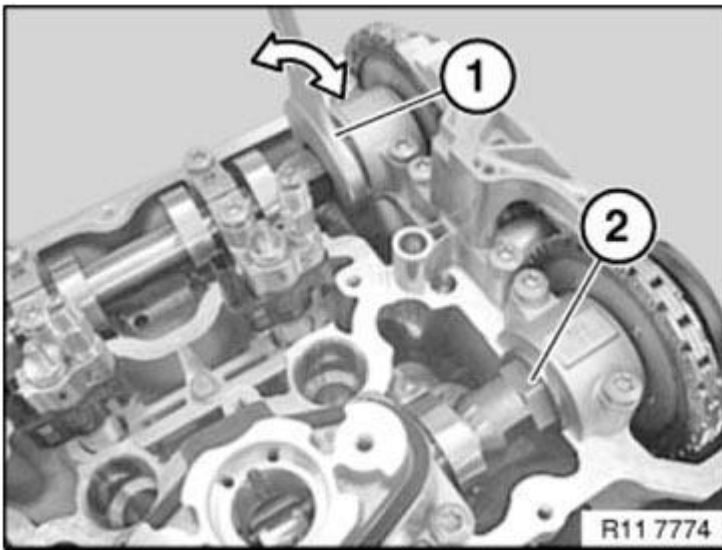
Rotating Exhaust Camshaft At Dihedron With Fork Wrench Into Suitable Position
